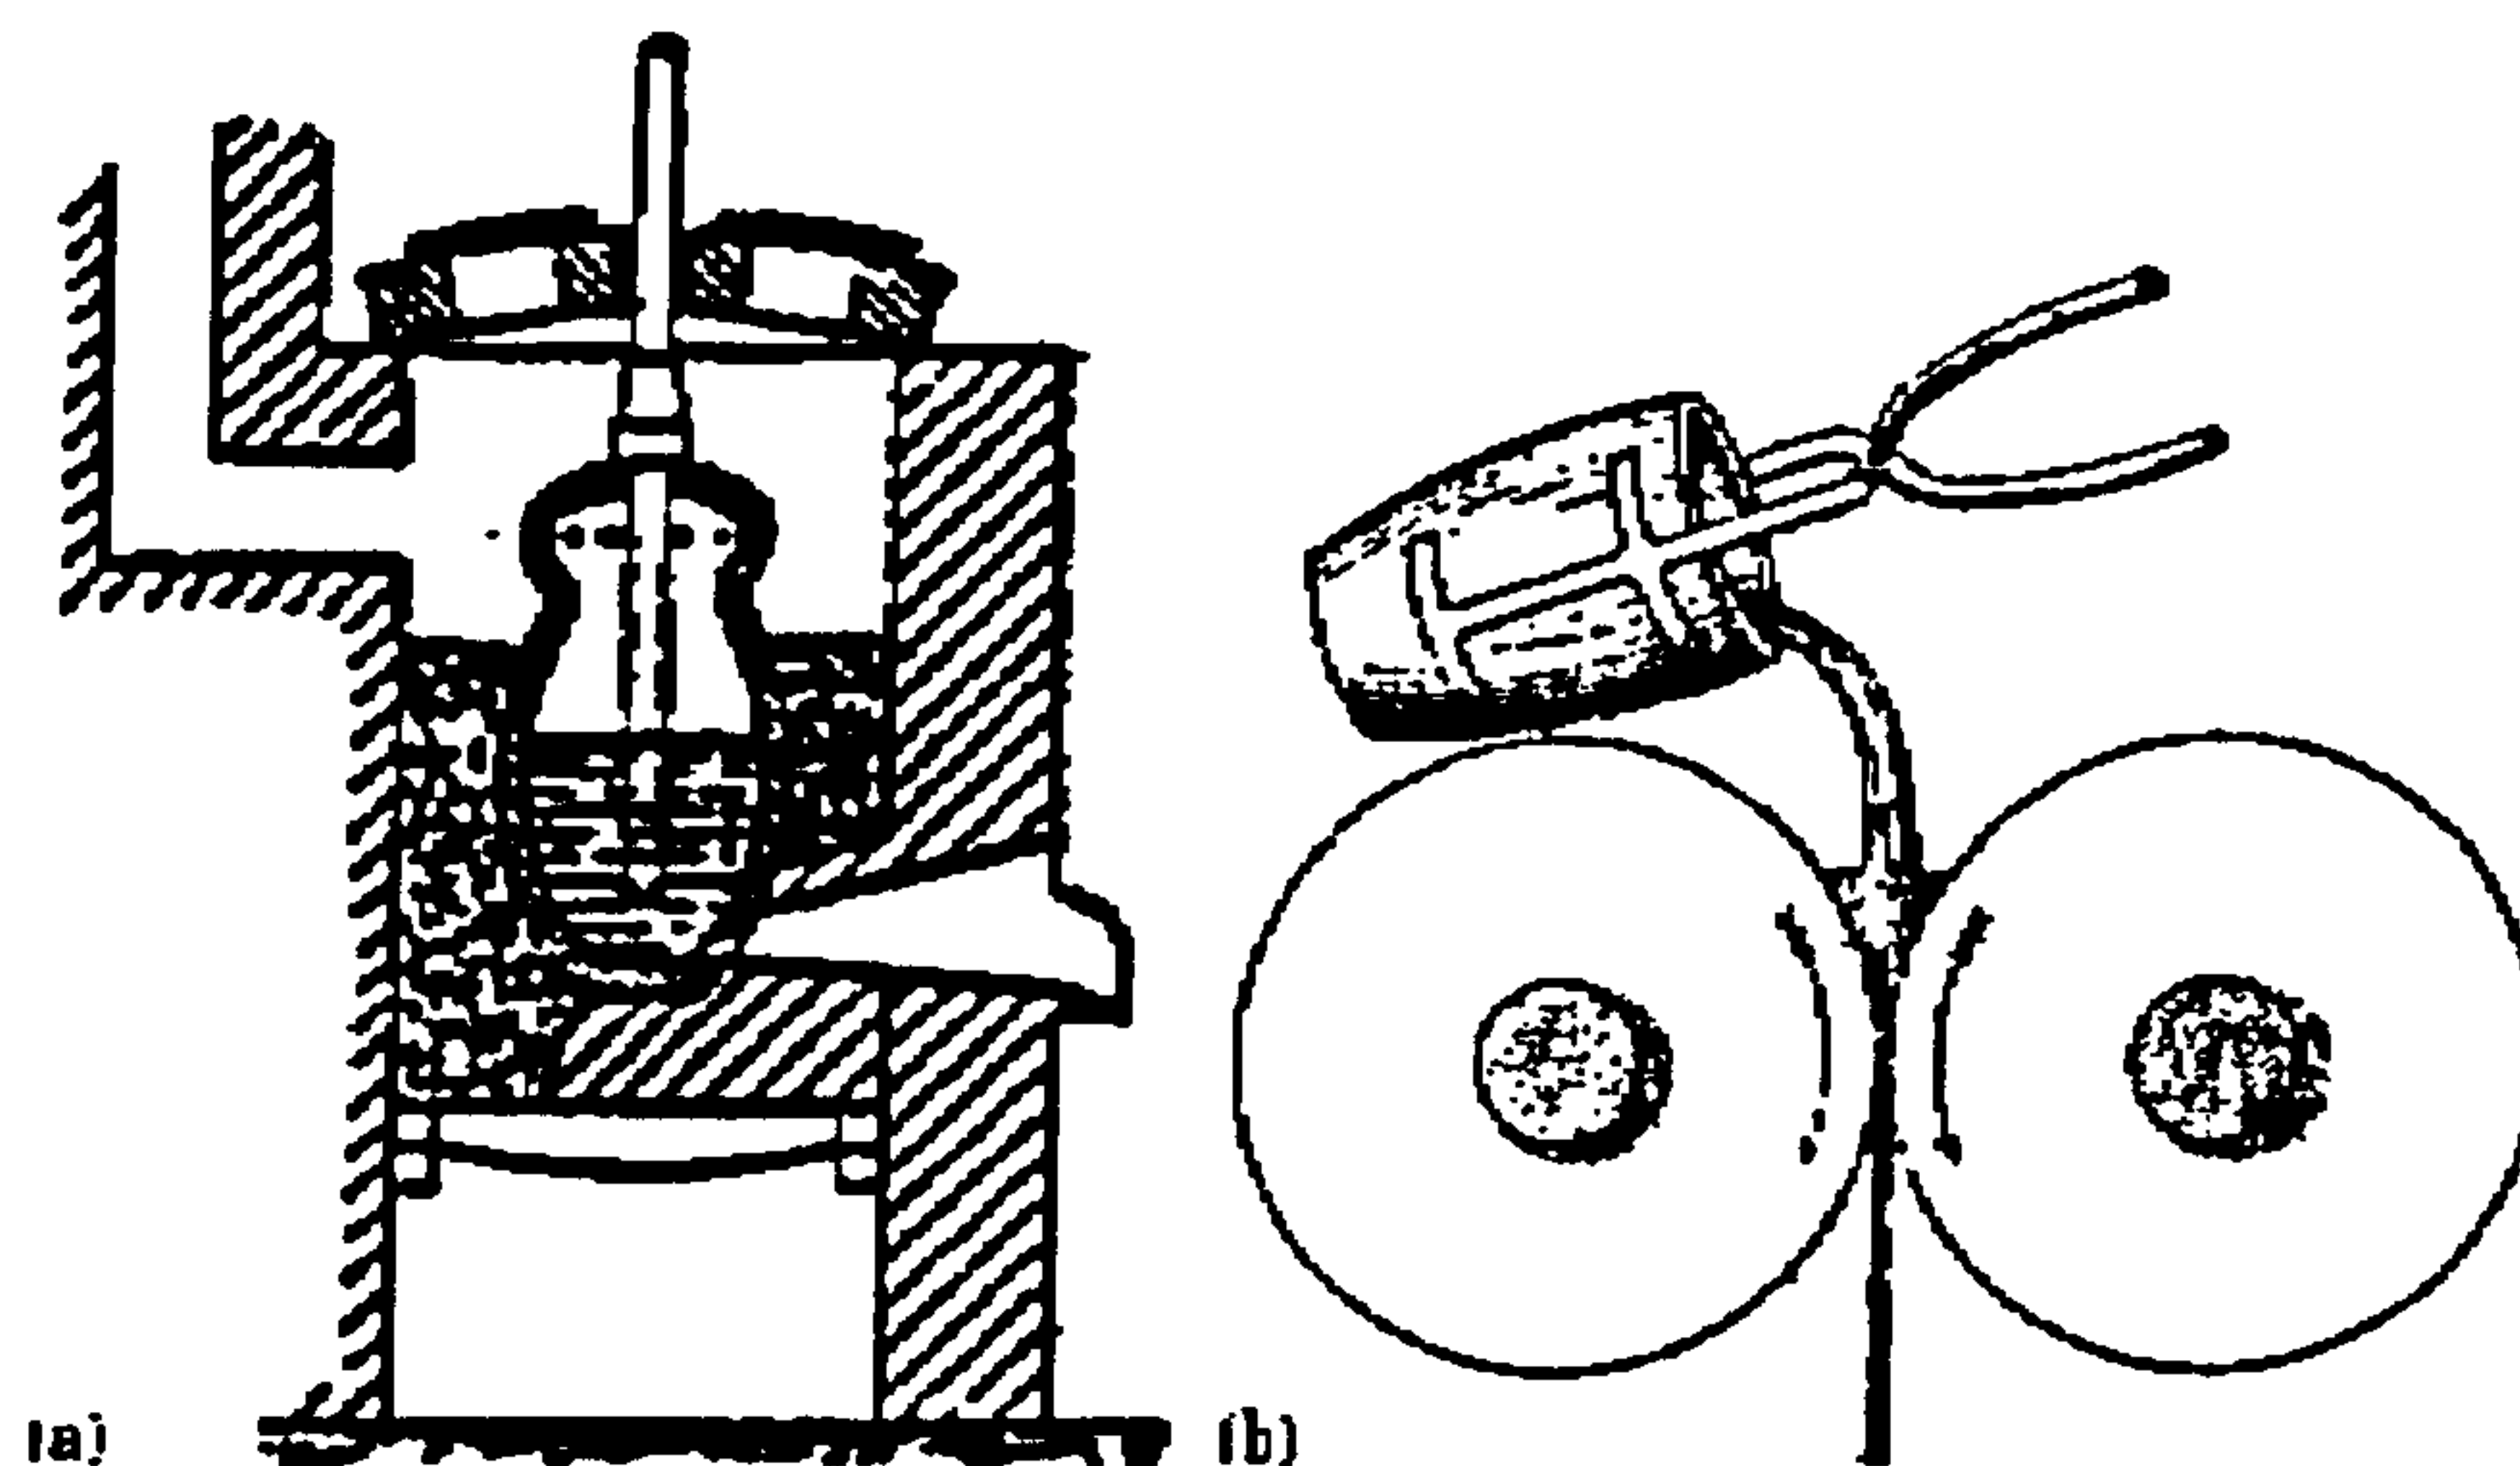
Bessemer's sketch of pneumatic steel making and direct strip casting
